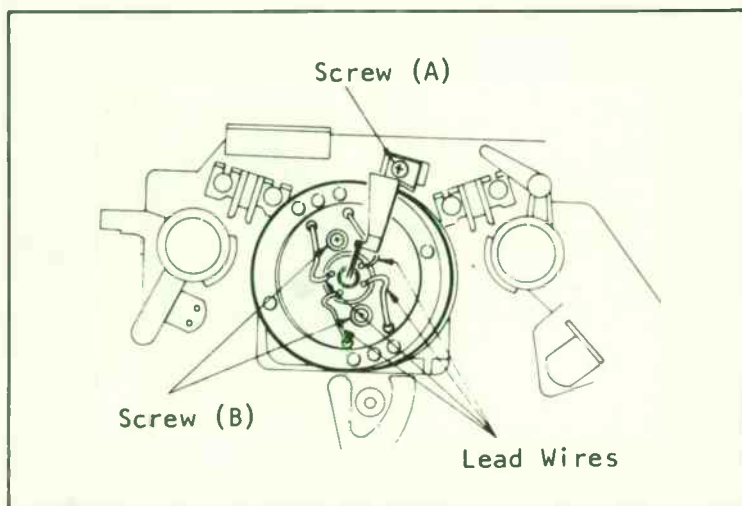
Upper cylinder head unit (courtesy of Magnavox).
